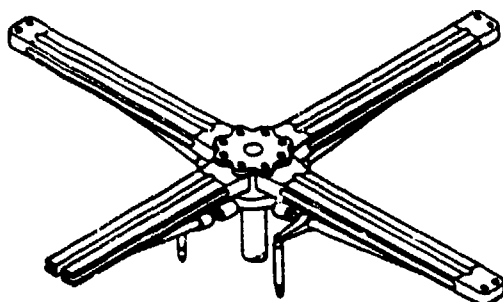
BEARINGLESS MAIN ROTOR HEAD OF BOEING VERTOL FOR B0105
